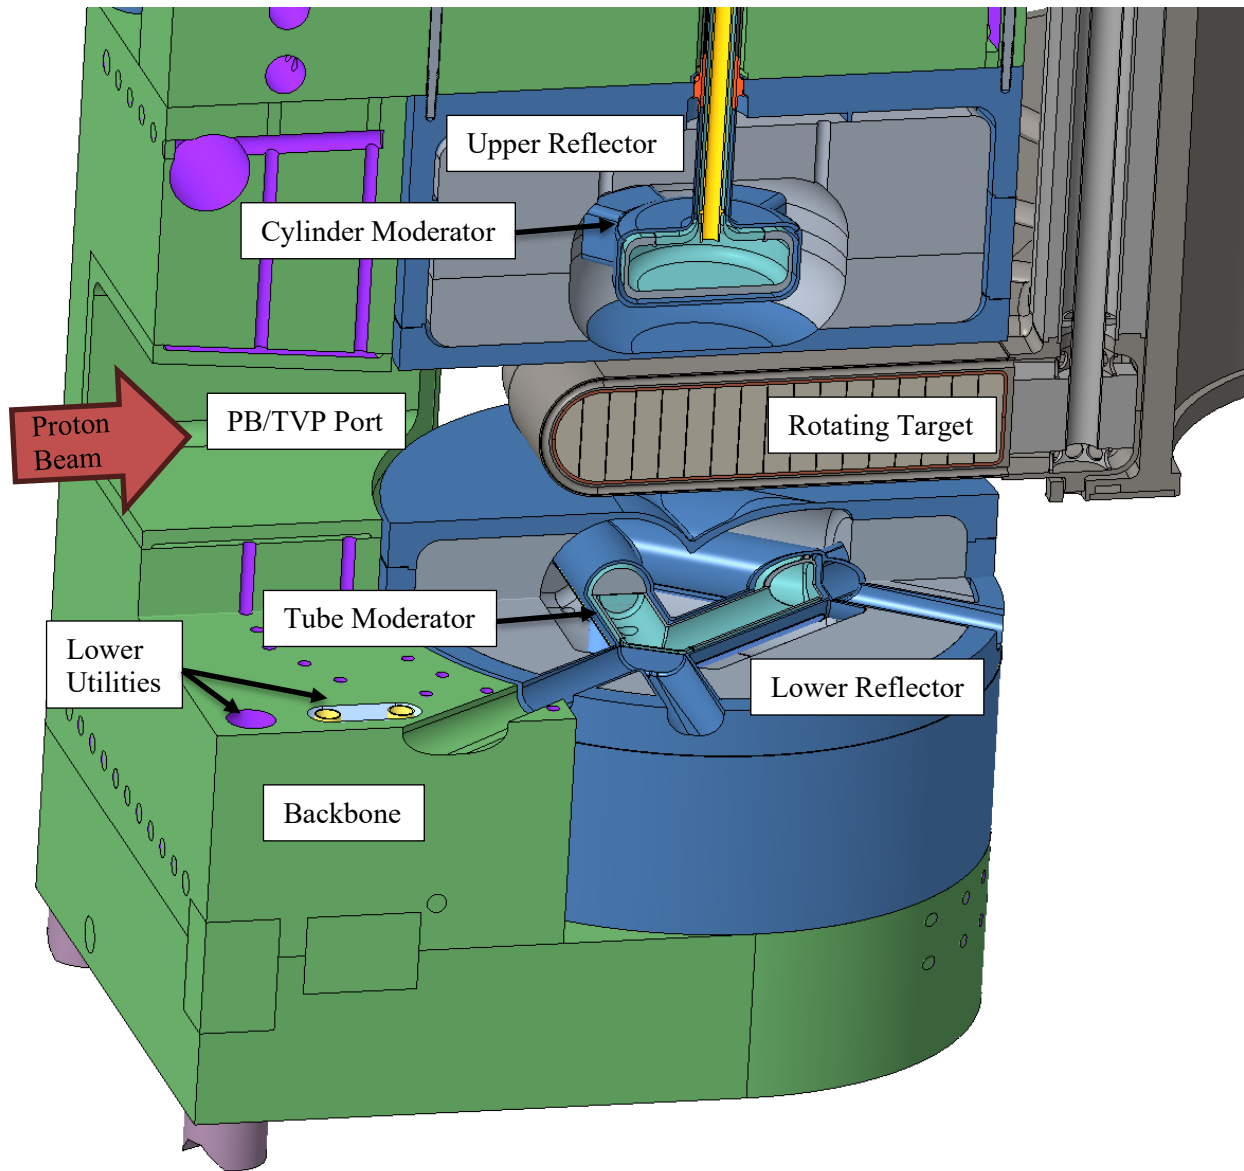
Moderator Reflector Assembly and Target Assembly Layout.
